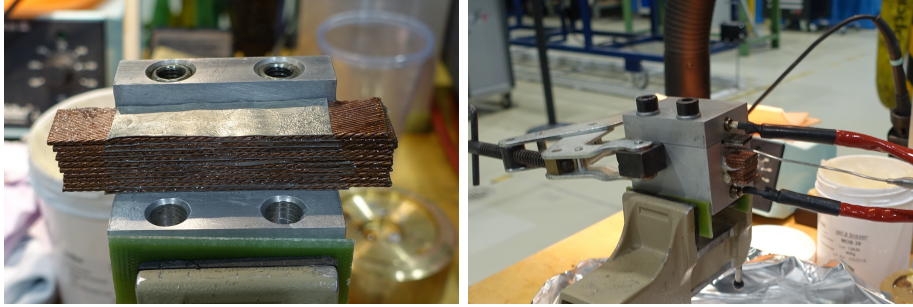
Alternating stacked cables with solder stripes (*left*) inserted into the heat-treatment mould with heat cartridges and thermocouple for soldering (*right*).
